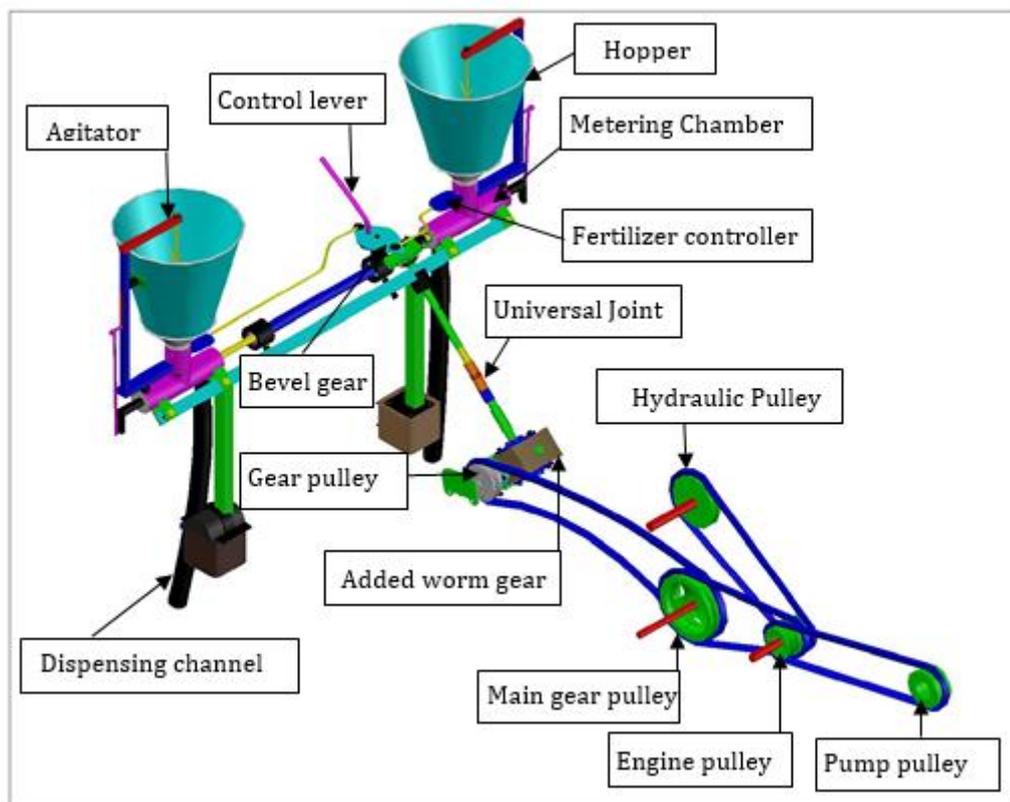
Isometric drawing view of power transmission from engine to the mixed fertilizer applicator
